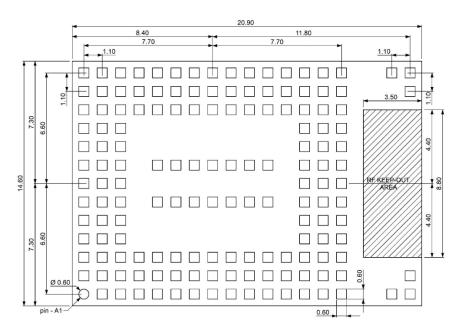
IRIS-W106 recommended PCB footprint (top view)
